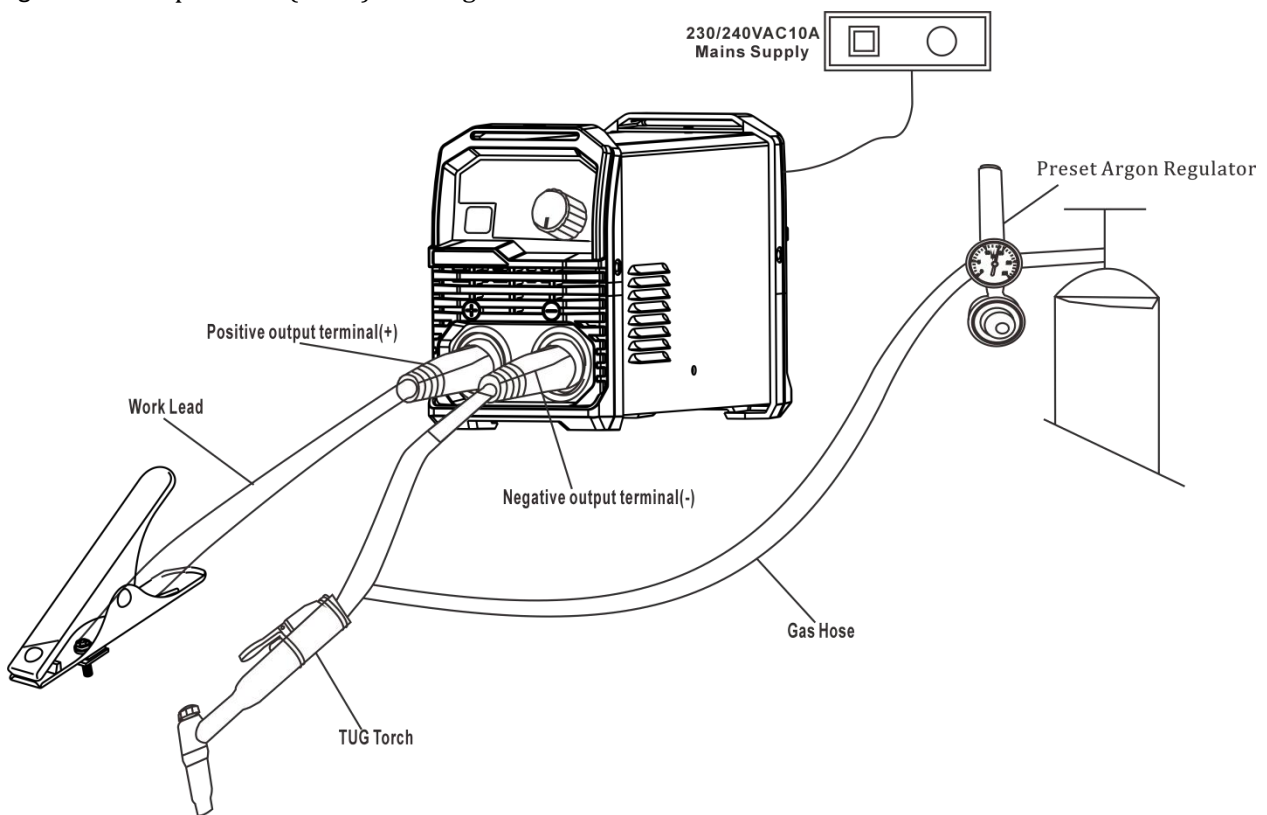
Setup for LIFT TIG(GTAW) Welding
